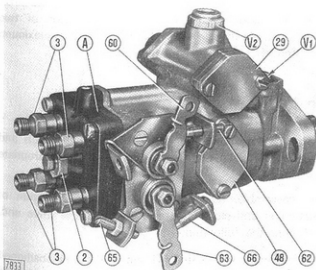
The Bosch Fuel Injection Pump for Four-cylinder Engines
